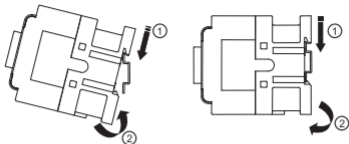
Installation and disassembly methods of HDC3-06 - 38
